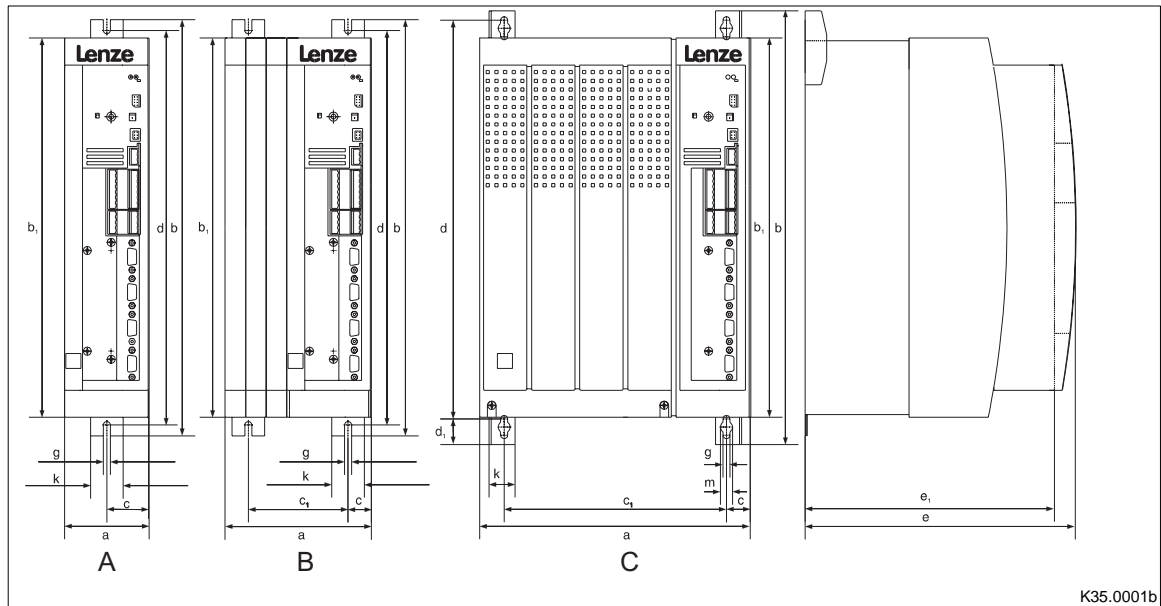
Dimensions for assembly with fixing rails/fixing brackets
